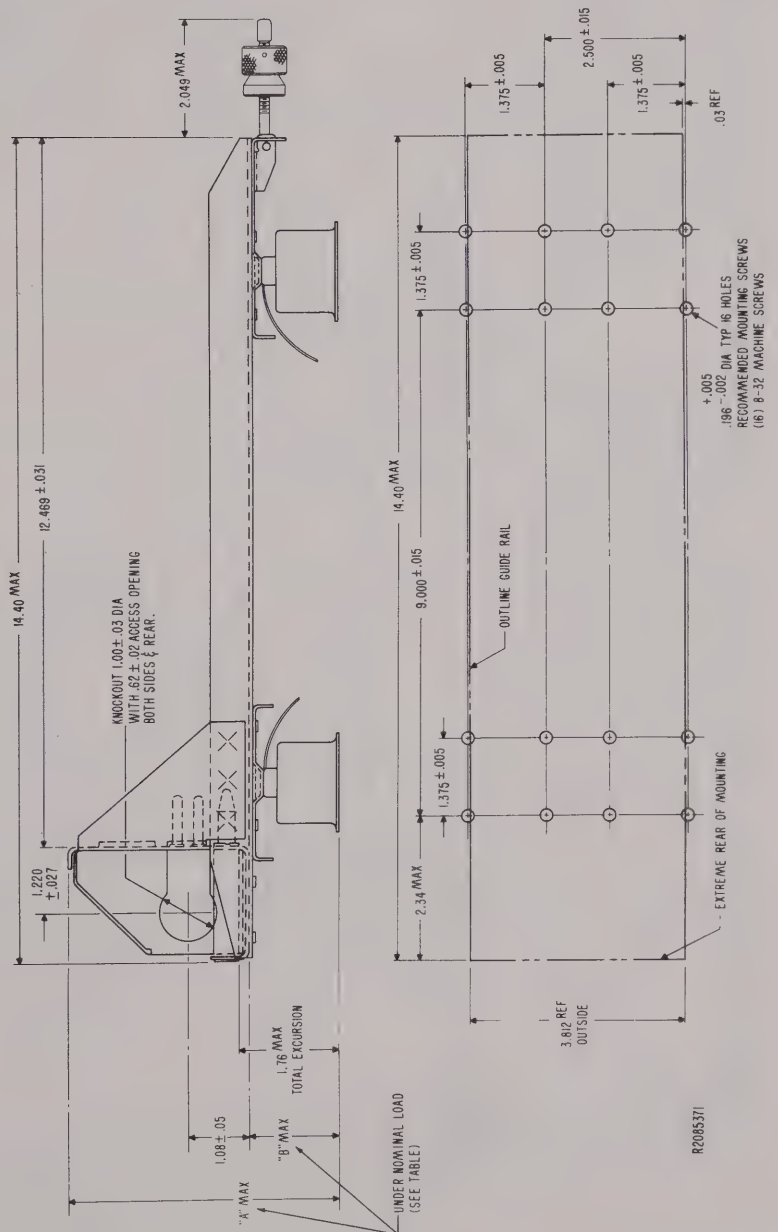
MTA-21B Shockmount (For Transmitter), Outline Drawing
